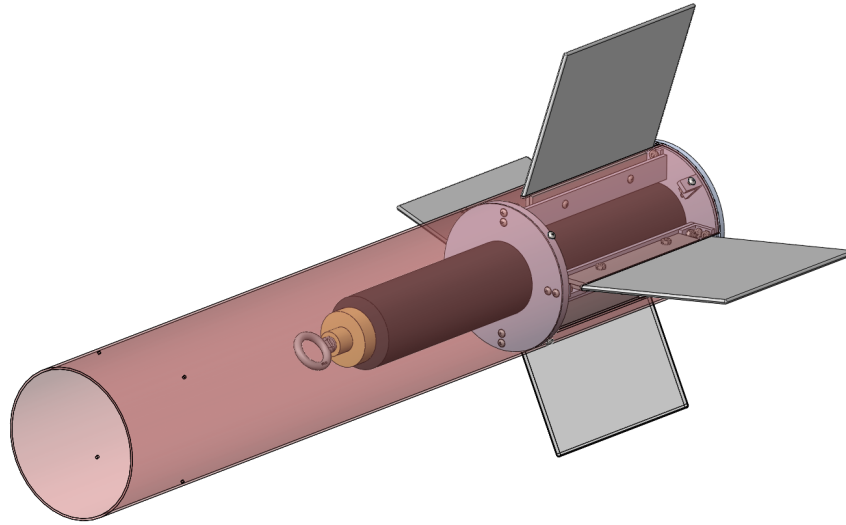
Drogue Parachute Bay/Fin Can assembly with inserted AeroTech RMS-75/3840 motor casing.
